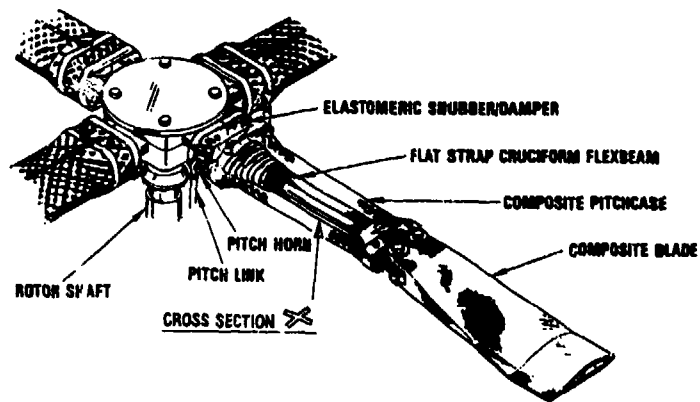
BEARINGLESS ROTOR HEAD OF HUGHES HARP
